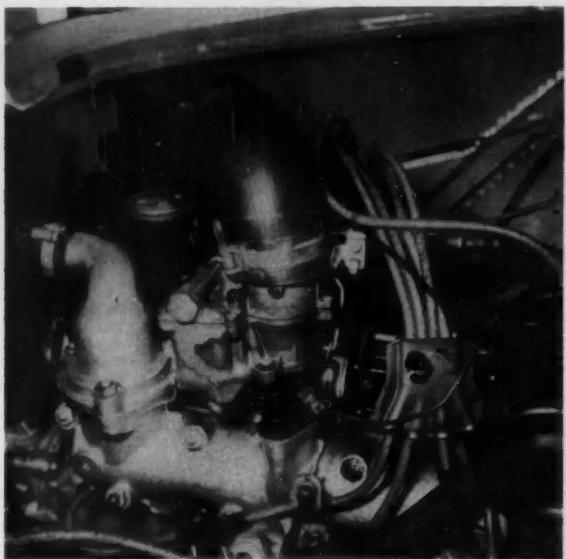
Simple, single throat downdraft carburetor is mounted directly to water cooled heated intake manifold. Air is brought to carburetor from air cleaner by large rubber tube. Vacuum for distributor control is taken from carburetor at throttle plate closure point. High tension wires are braided and lacquered linen, over rubber—a form of construction not used here for many years. Spark plugs are almost buried under manifold.
